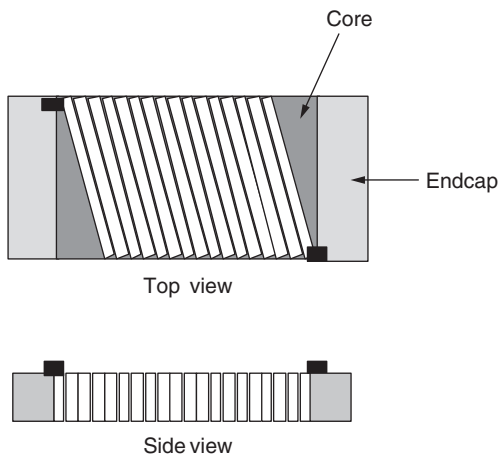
Cross-sectional view of a wound surface mount RF inductor.
